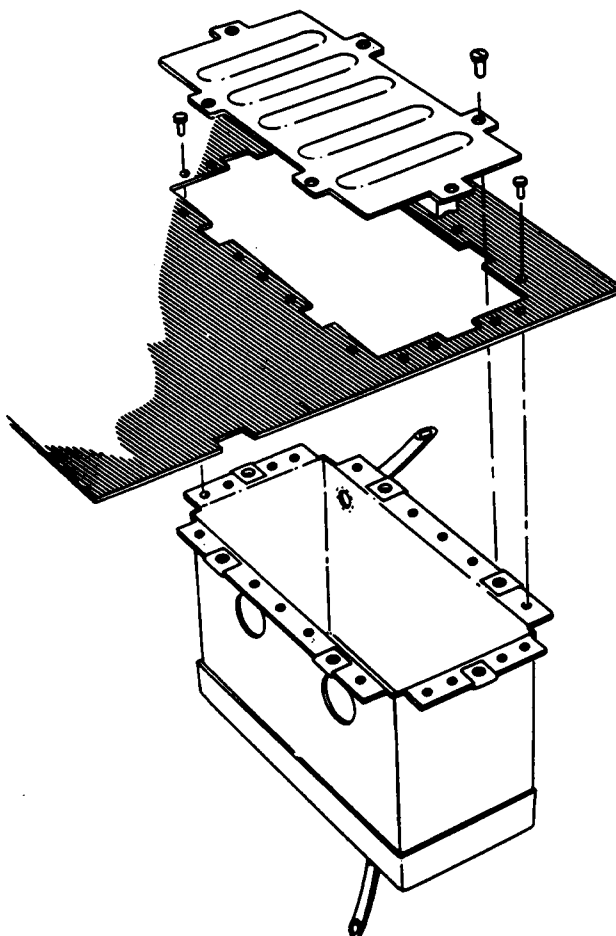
Typical battery box installation suspended from cabin floorboard section.
